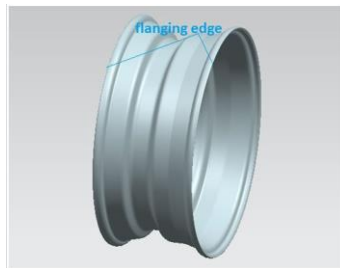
Flanged steel wheel, source: LittleDuck, wheelmachinery
